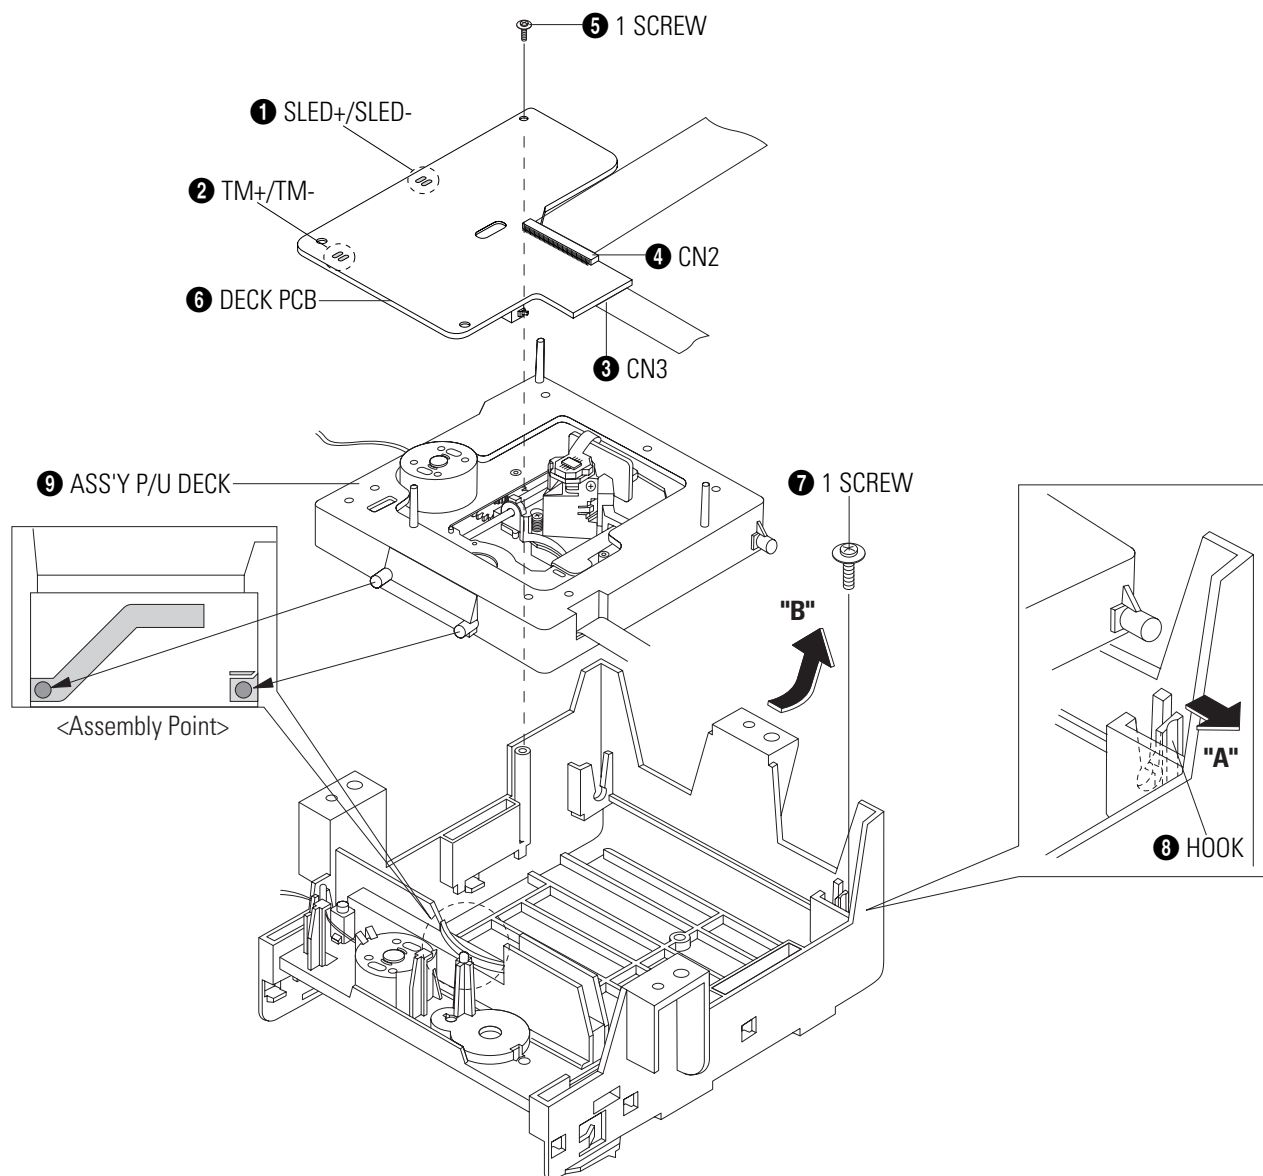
PCB Deck Ass'y and Ass'y P/U Deck Removal
